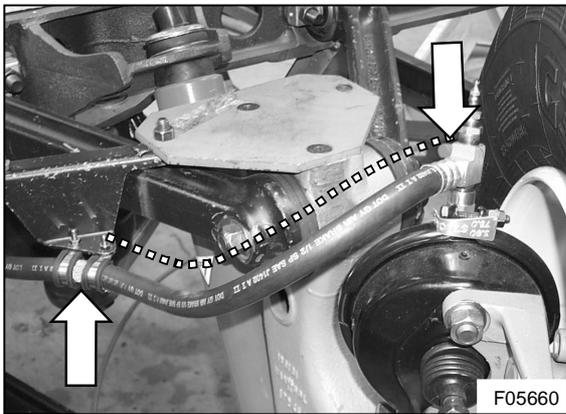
Hose to steering knuckle bracket VH 10761391
